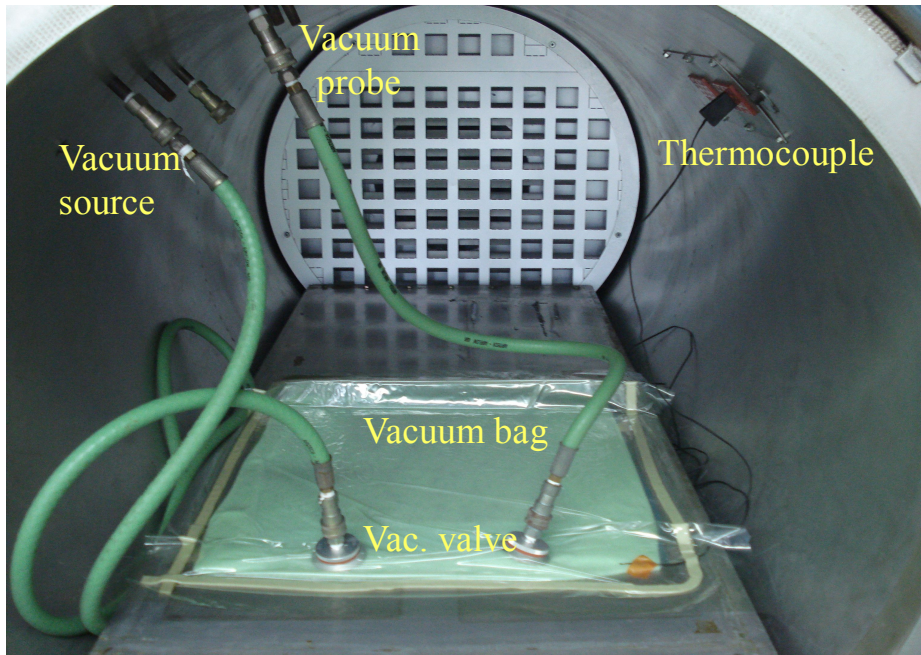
Specimen manufacturing process of vacuum bag molding process
